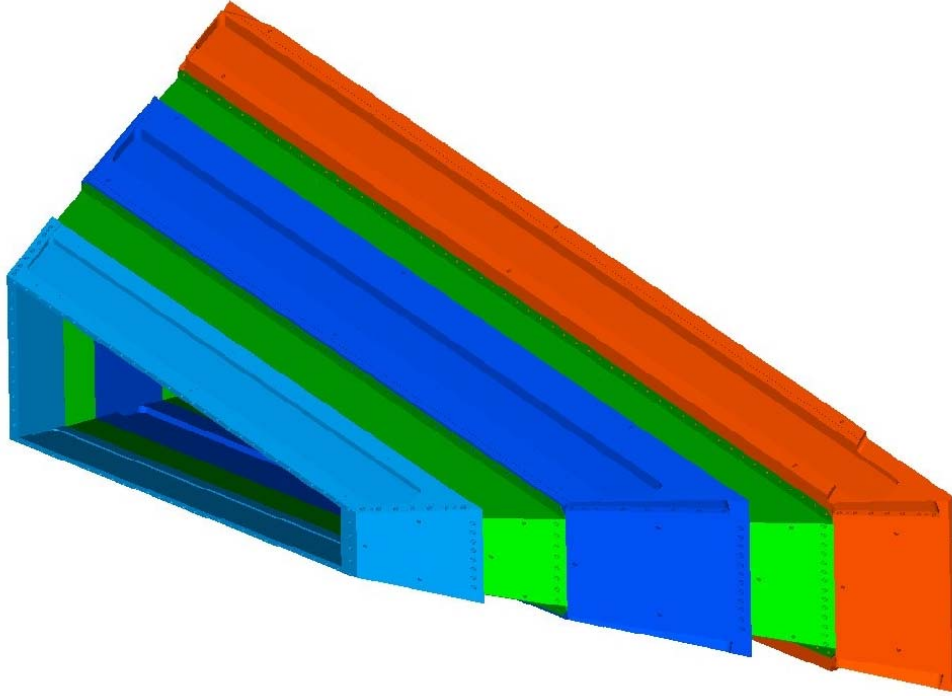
Isometric view of all three drift chambers assembled into a single gas volume.
